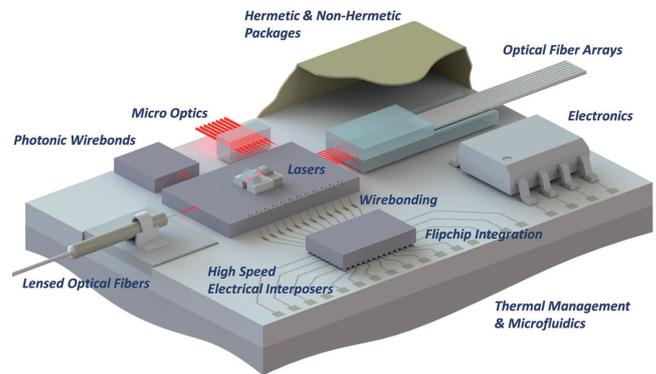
Example of co-packaged optoelectronic module from CAD tool (Image: www.pixapp.eu)
